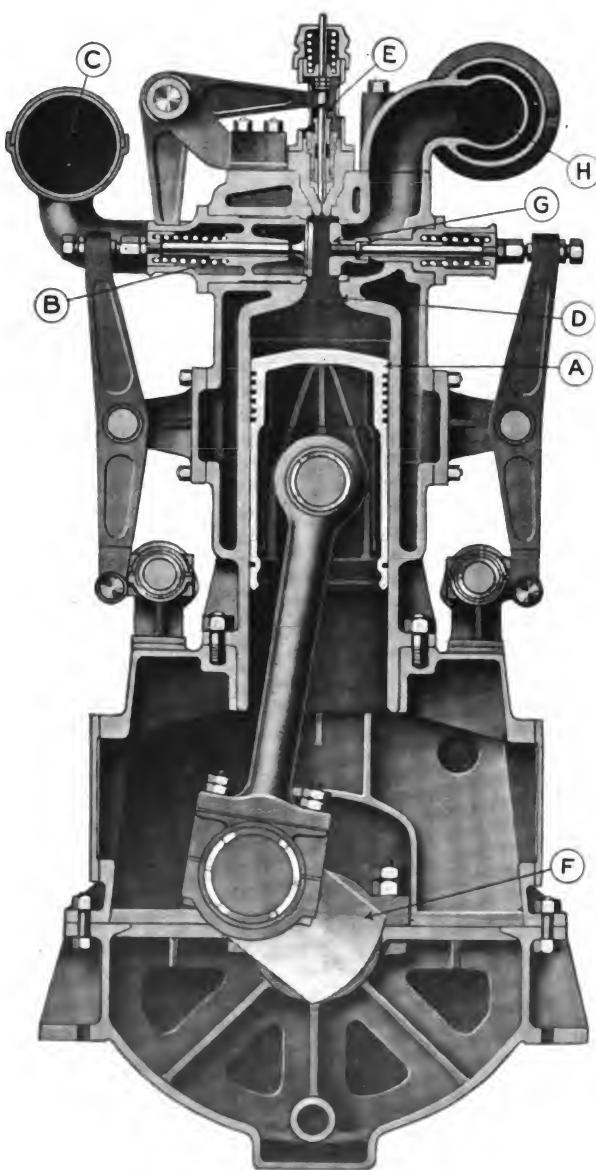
Cross section of Nelseco engine. A, piston; B, intake valve; C, intake manifold; D, cylinder; E, fuel valve; F, crankshaft; G, exhaust valve; H, exhaust manifold
